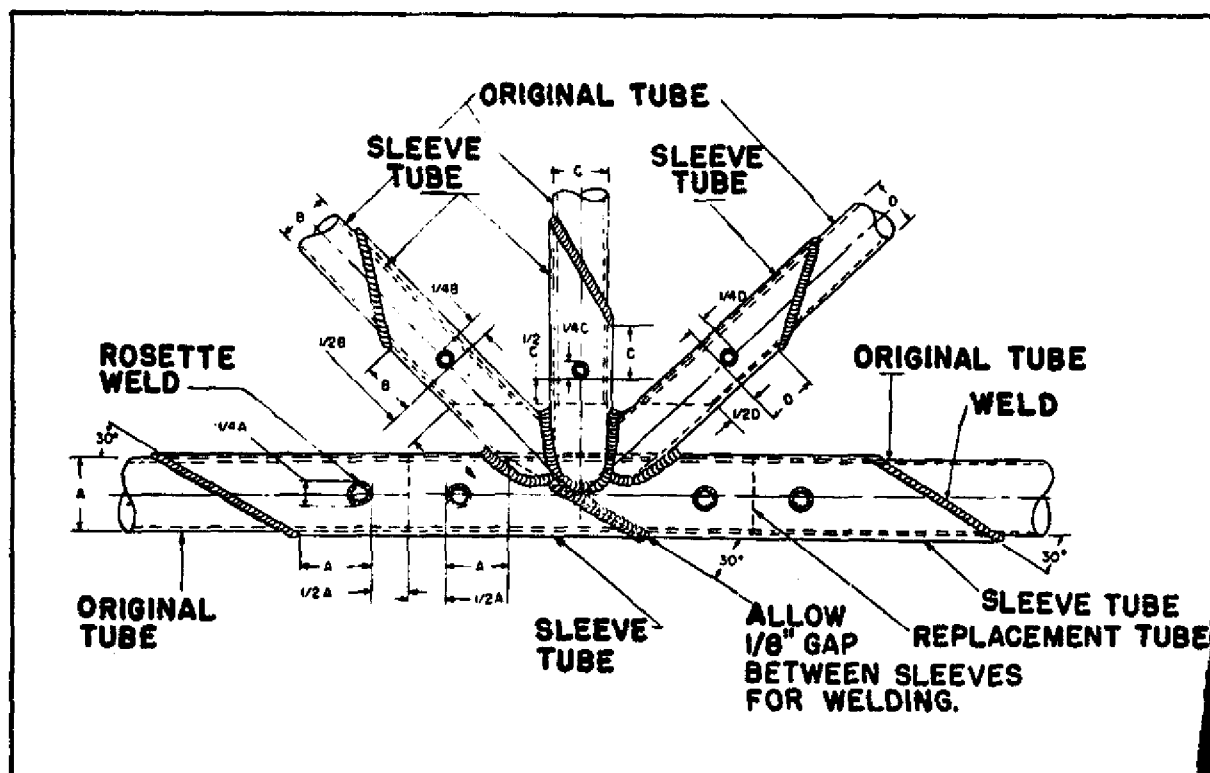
Tube replacement at a station by welded outer sleeves.
